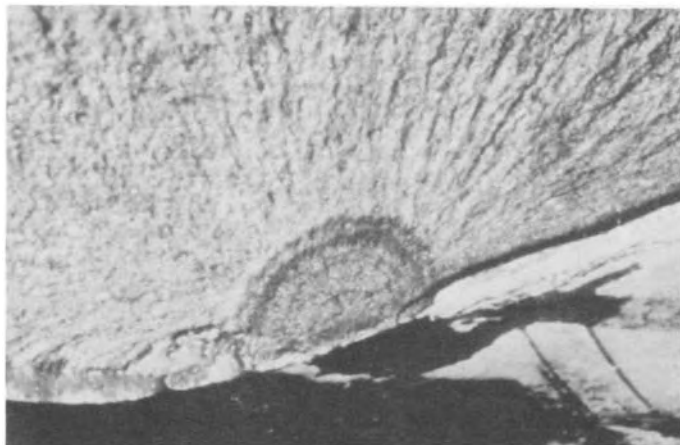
Stress-corrosion crack in a high-strength steel part; 4x. Fracture surface appears to have the characteristic beachmark pattern of a fatigue fracture. However, this was a stress-corrosion fracture in which the pattern was caused by differences in the rate of corrosion penetration. Final fracture was brittle. Source: Ref 5
